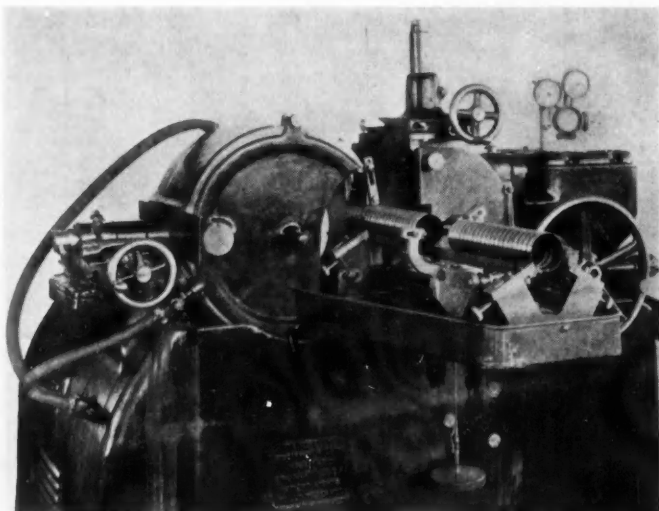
Centerless Grinder Set Up for Grinding Ball-Bearing Races
